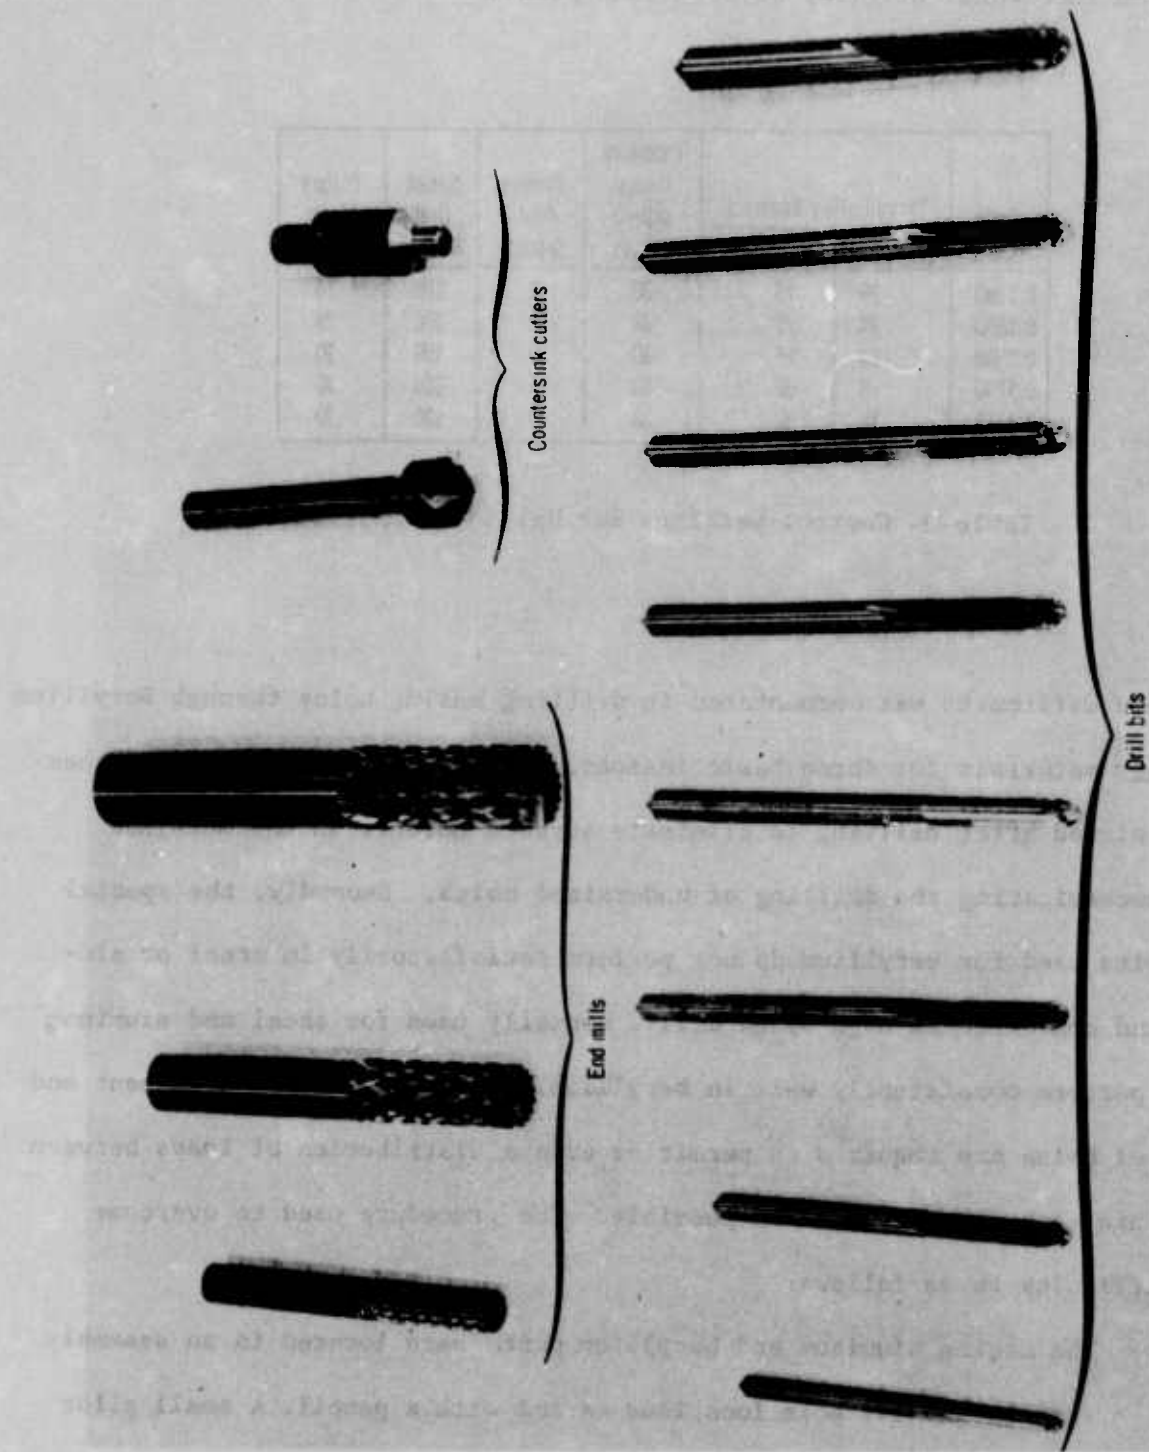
Tools Used to Machine, Drill and Countersink Beryllium
